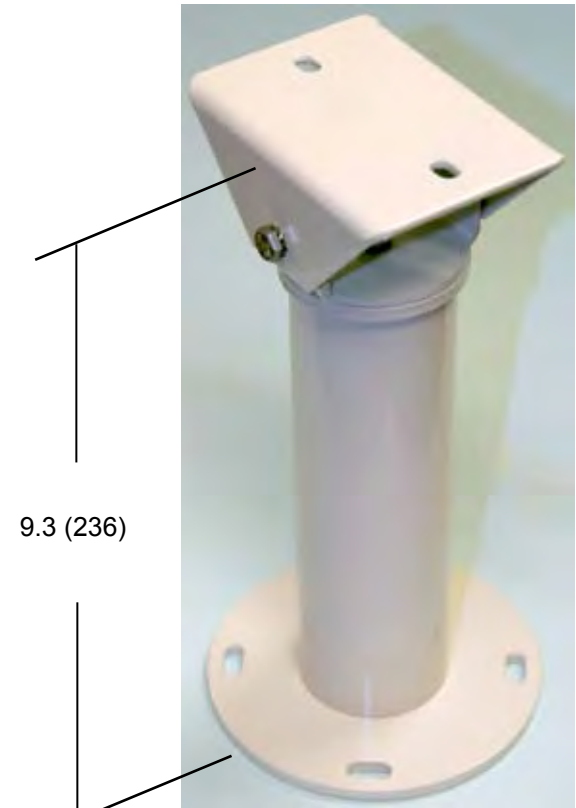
Mounting Dimensions, Pedestal (PEDD) Mounting Base
